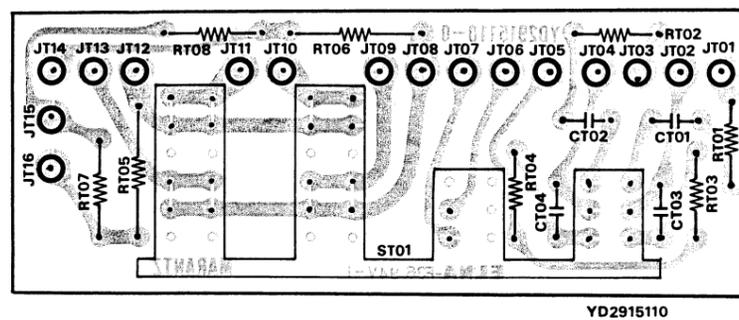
Main and Remote Switch Assembly (PT01) Component Locations
